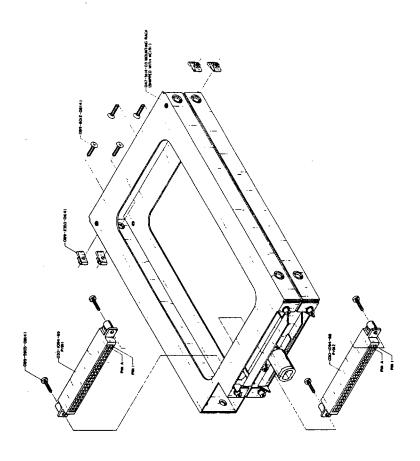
F KC 191 INSTALLATION DRAWING (Sheet 2 of 2)
